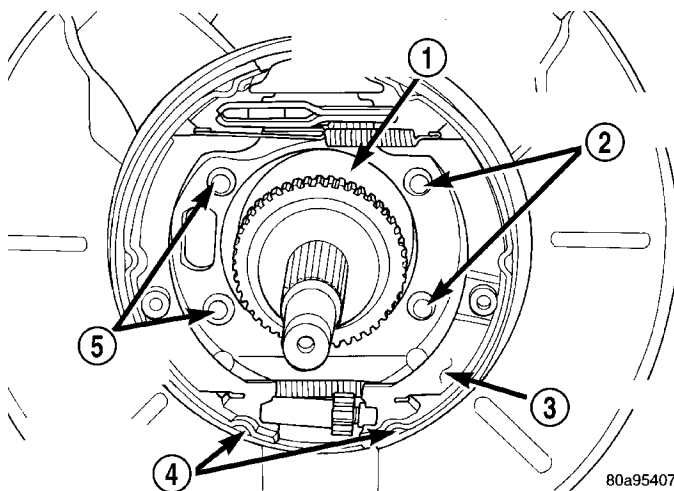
Adapter Installed On Mounting Bolts (AWD Shown)
